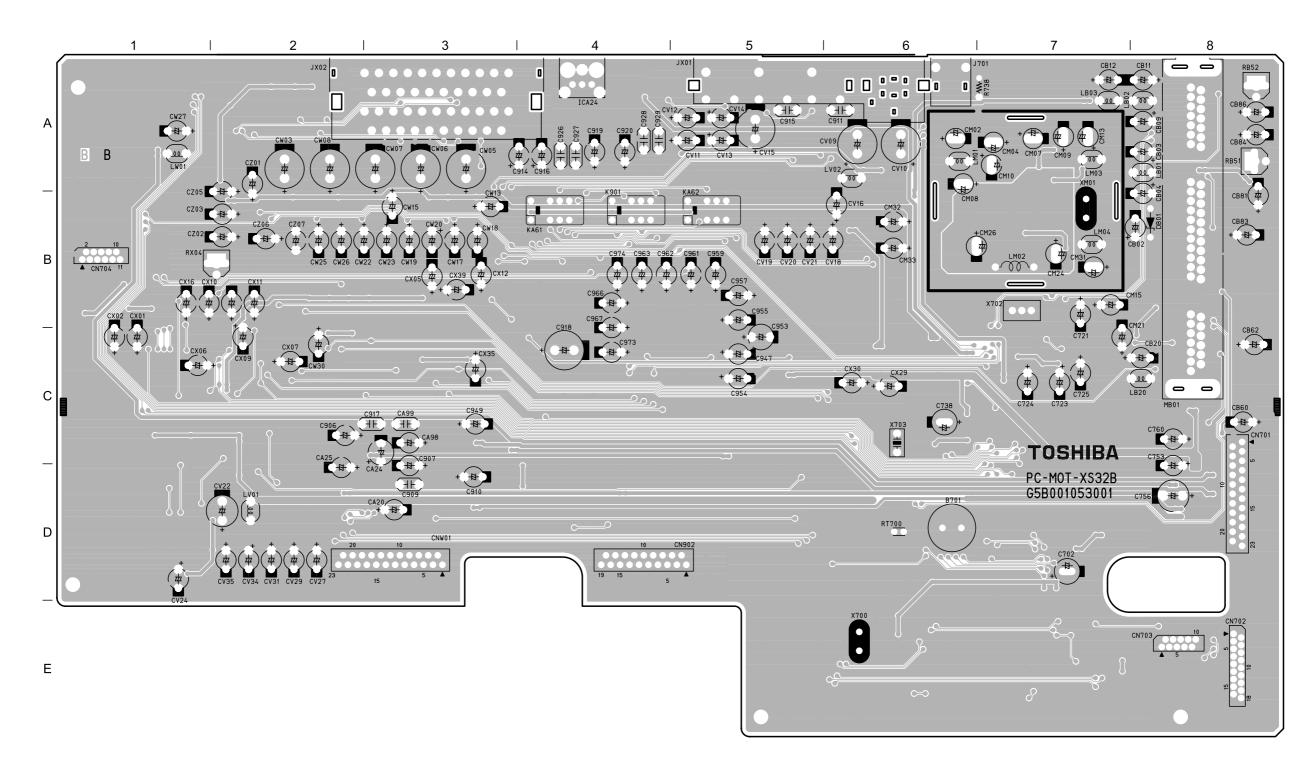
EU05 Mother PC Board (Top side)
